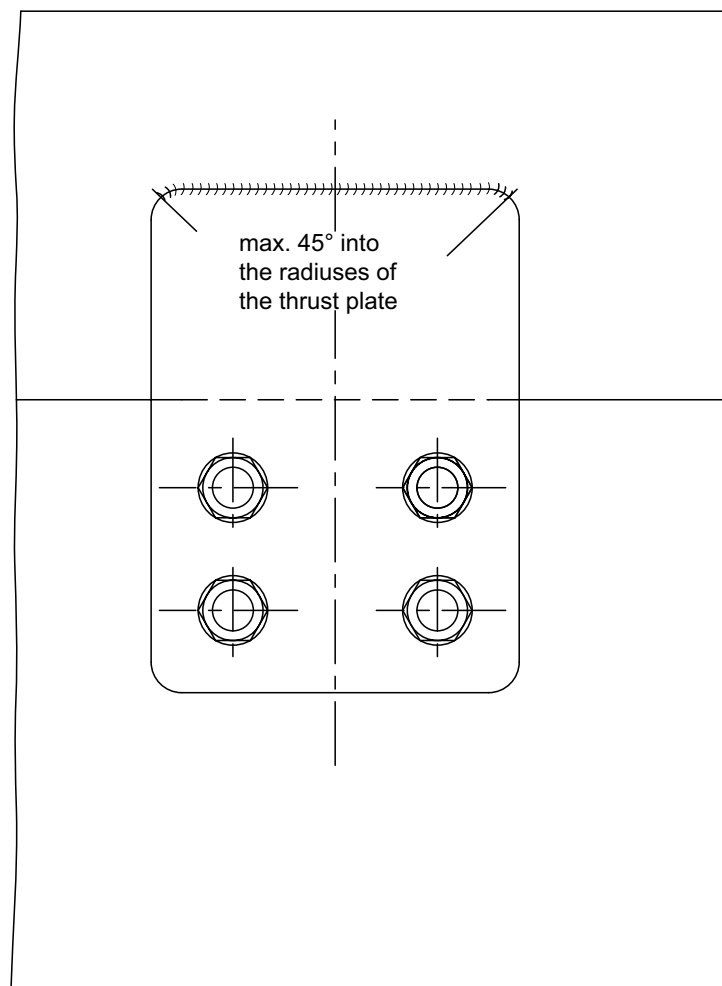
Fitting shear plates, long shear plate ESC-019 with bolts ESC-037
